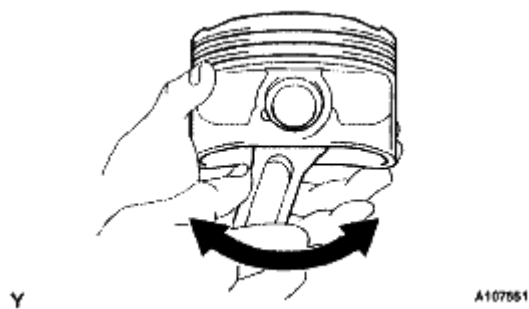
Checking Fitting Condition Between Piston & Piston Pin
